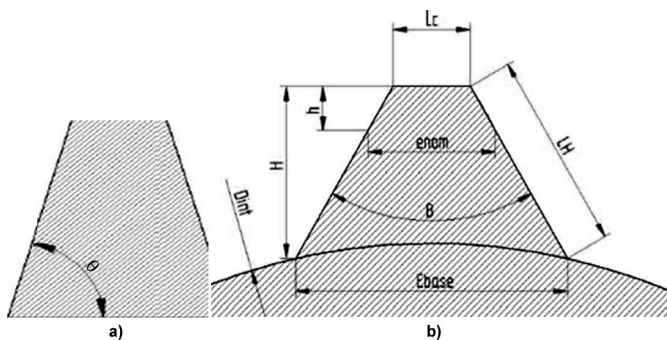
Geometry of the tool: a. Angle between rake and flank face; b. General dimensions for a cutting tooth.
